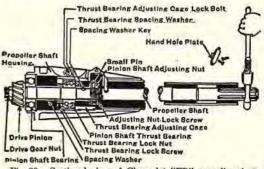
Sectional view of Chevrolet "FB" propeller shaft.
